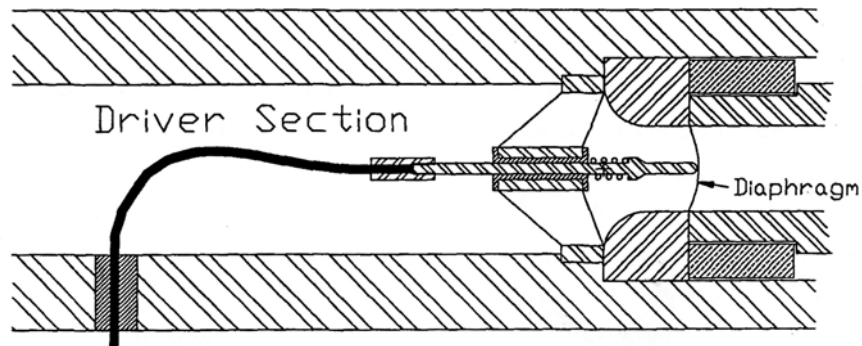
Schematic view of diaphragm bursting system inside the driver [2]
